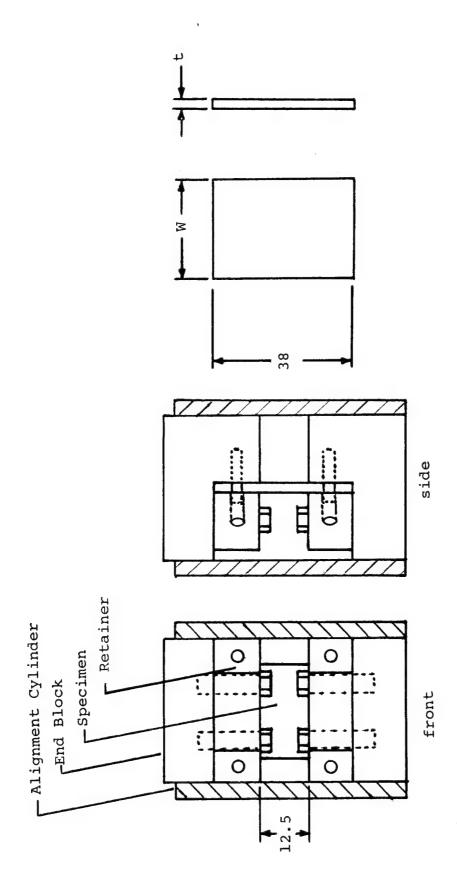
Sketch of end-loaded-coupon fixture and specimen.
